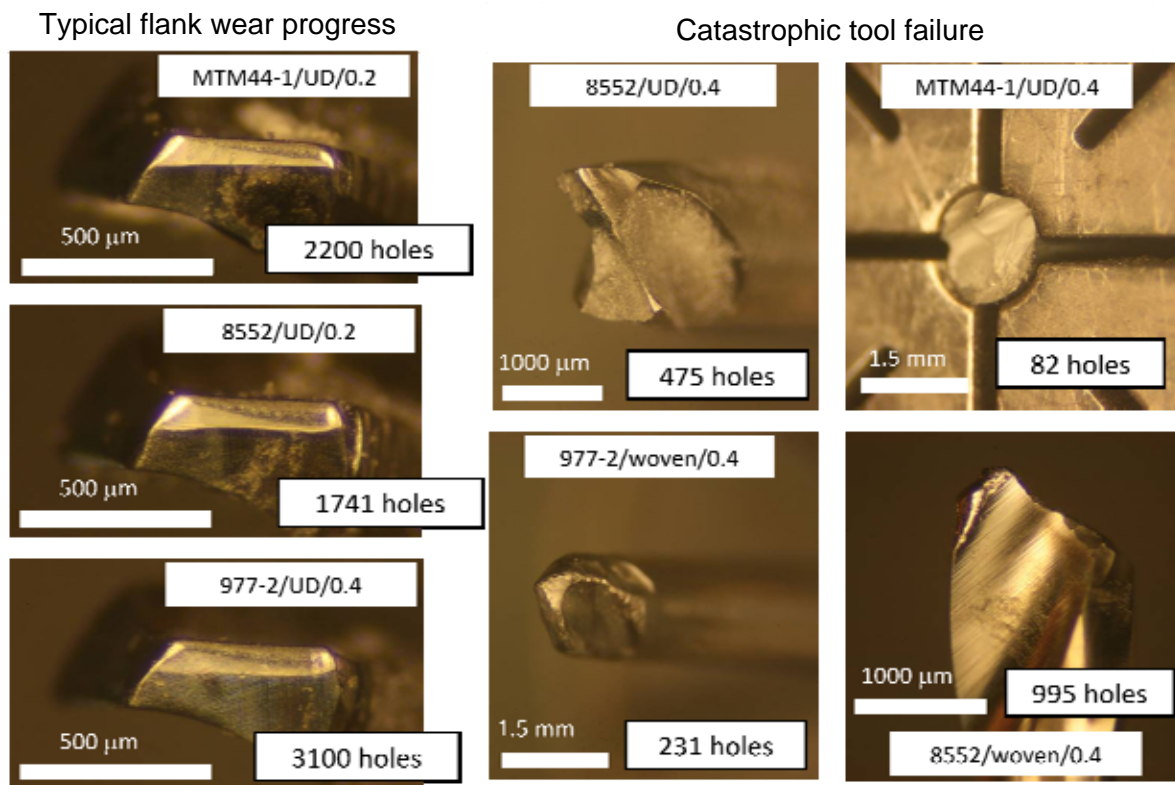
Micrographs of tool at test cessation (tests performed using the stepped drills)
